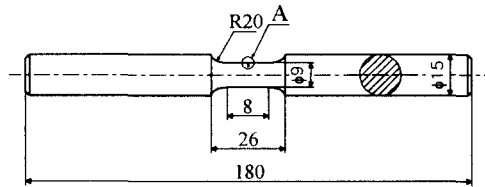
Geometry of fatigue test specimen (unit : mm)
